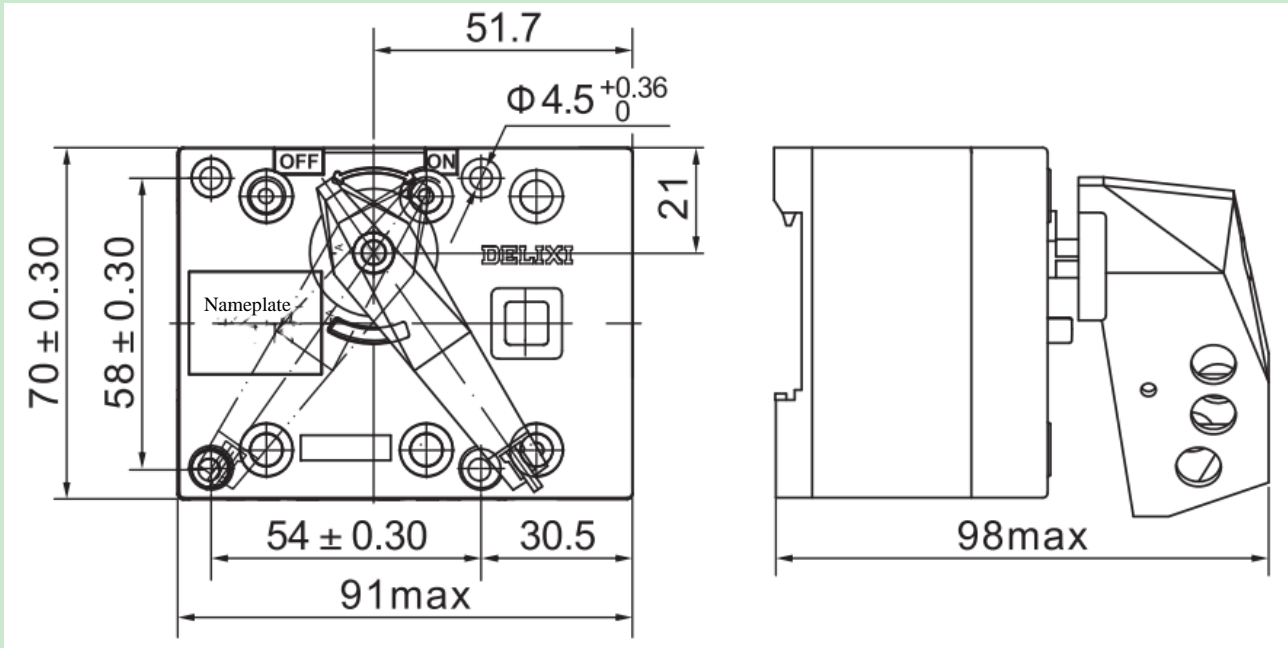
Outline and installation dimensions of HGL, HGLi-16 ~63/3 disconnector
